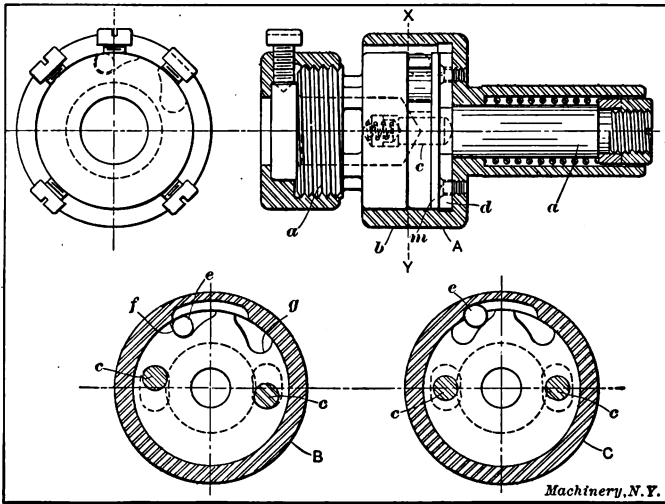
Illustration showing Operating Parts of Releasing Button Die Holder
